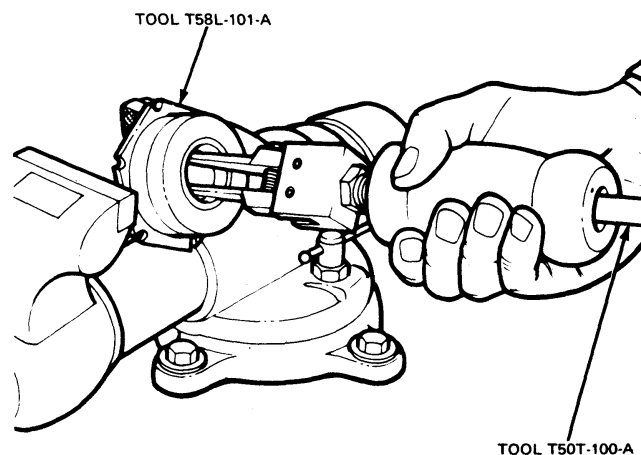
Removing Wormshaft Lower Bearing Cup from Adjuster Plug
